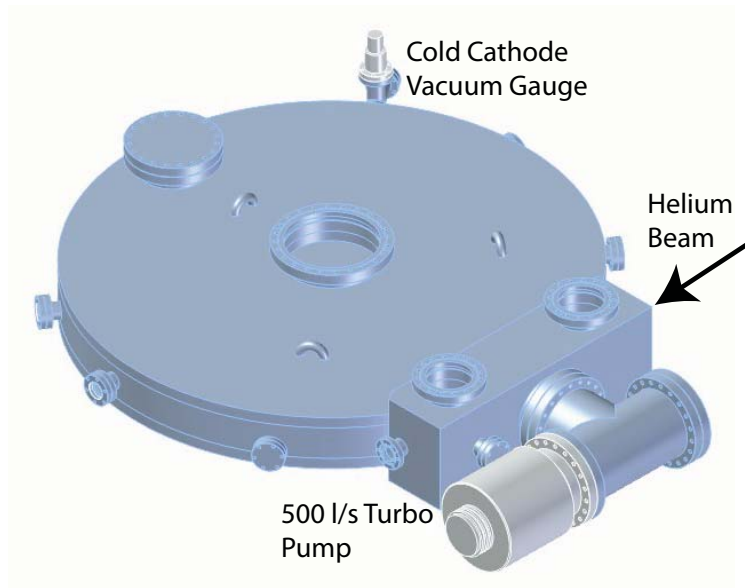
A CAD image of the rotor chamber. The chamber is pumped by a 500l/s turbo pump (indicated). The chamber walls are 1 inch thick 304 stainless steel, and the chamber disc is 112cm in diameter and 12.7cm high.
